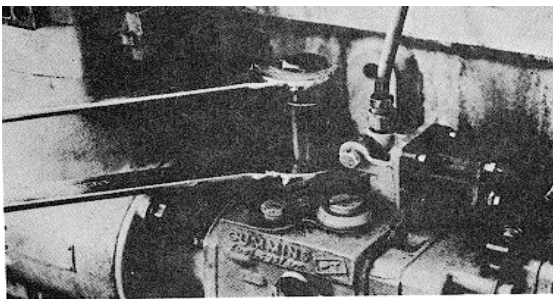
, F5300. Removing tachometer drive assembly with ST-1326
